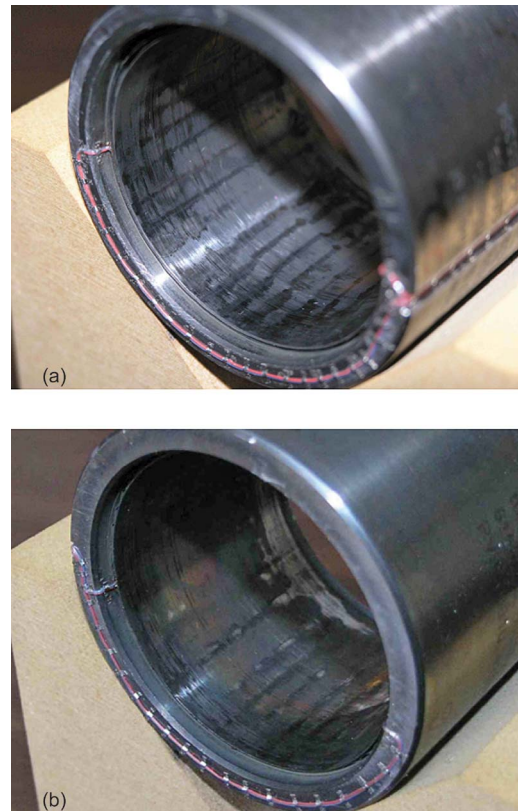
Sample photographs of the test bearings after misalignment tests showing top foil wear patterns and thermocouple placement. (a) Turbine end bearing and (b) compressor end bearing.
